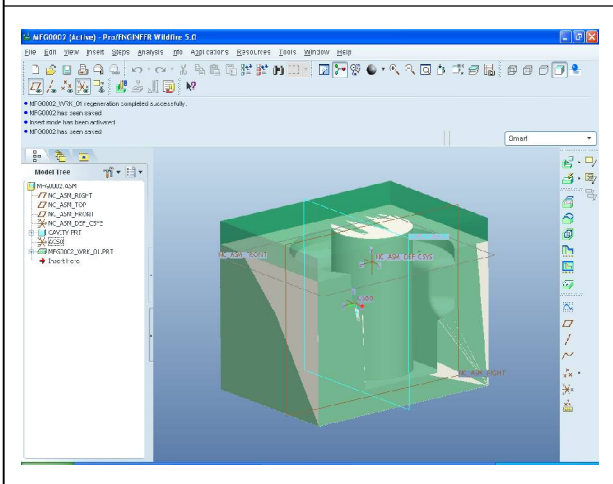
Cavity in Manufacturing (NC Assembly) Module
